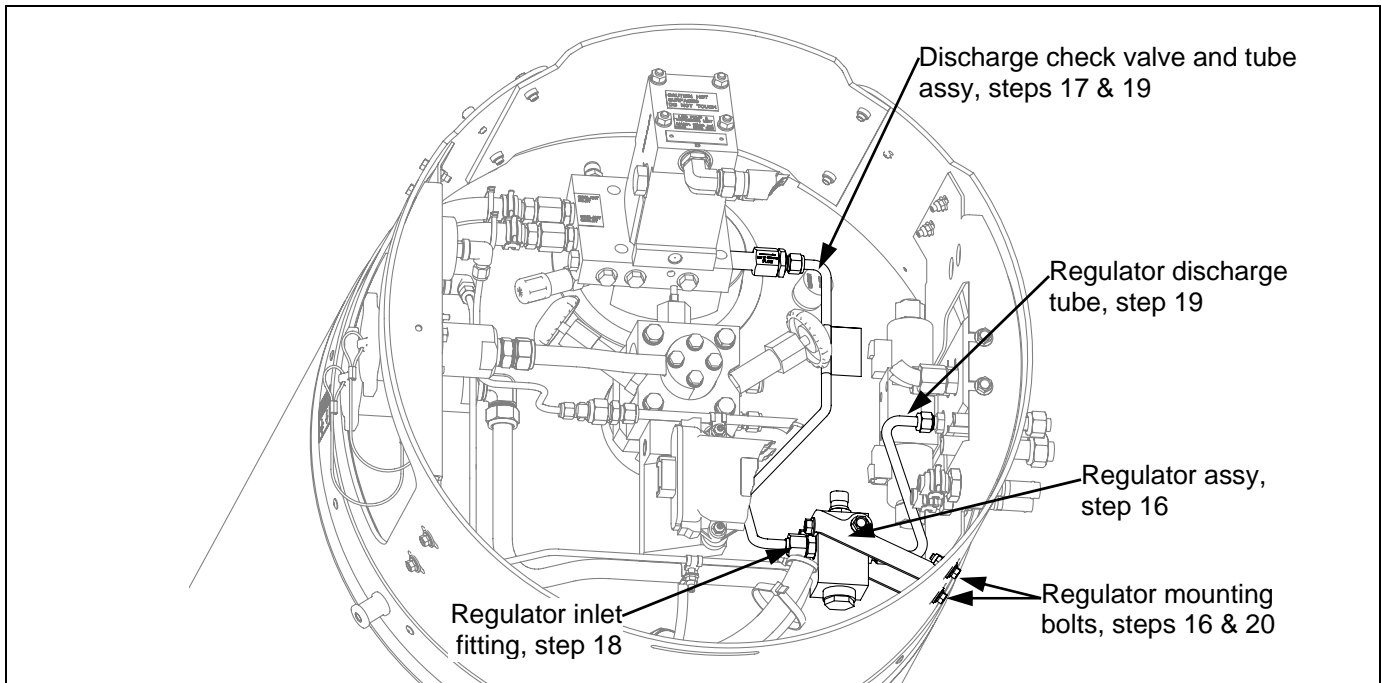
Installation location of regulator components and tube assemblies (LHS tank)
